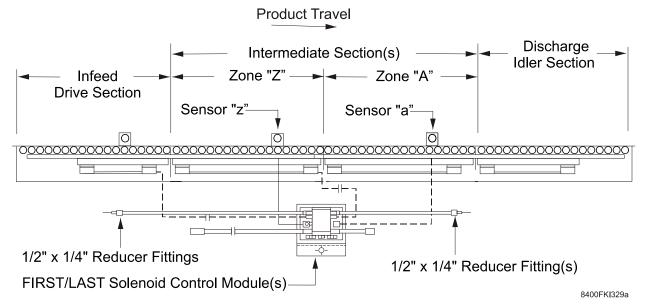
First/Last Solenoid Control Module Connections (Air) to Terminal End Sections
